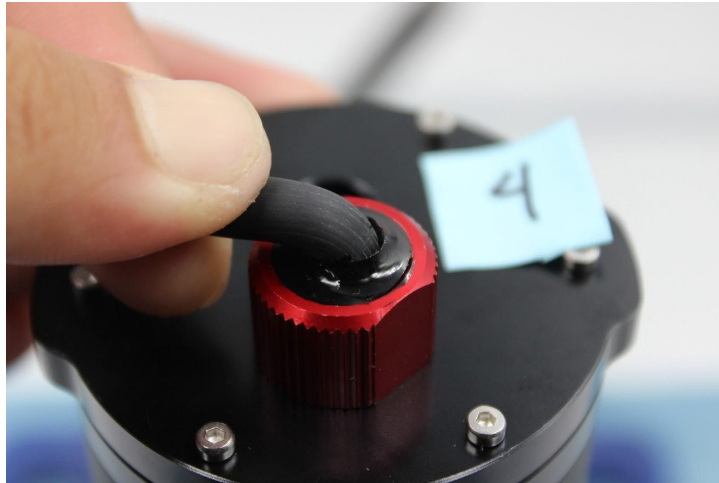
Cable Penetrator with poor adhesion to aluminum cable penetrator and cable jacket.
